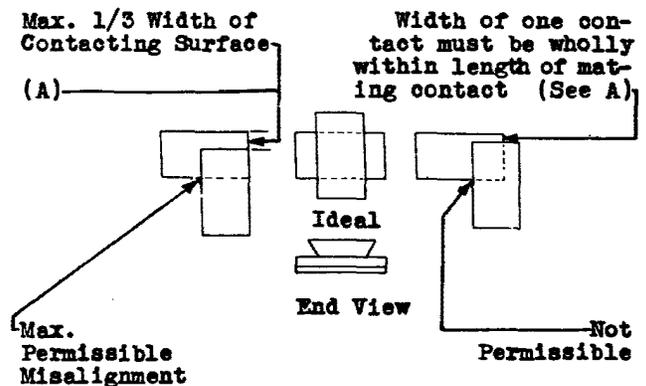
Fig. D — Alignment of Heavy Bar Contacts — Plan View of Contacting Surfaces
